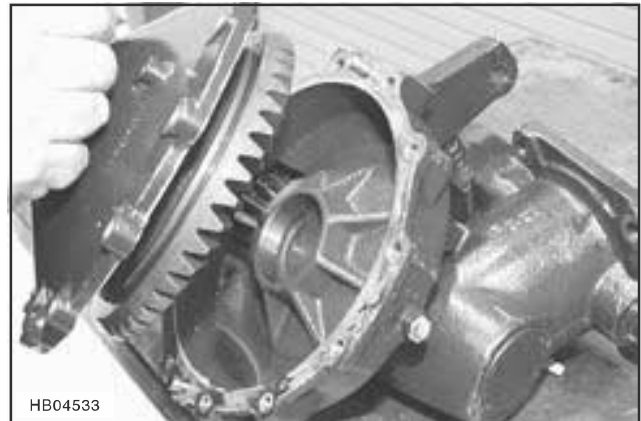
A-24: To remove wheel shaft cover assembly, proceed as follows:
